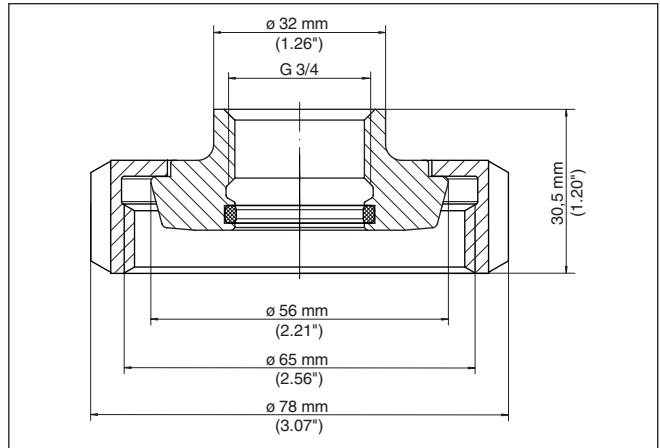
Dimensions of threaded adapter G $\frac{3}{4}$  (DIN 3852-X) on slotted nut DN 40 (DIN 11851) PN 16
